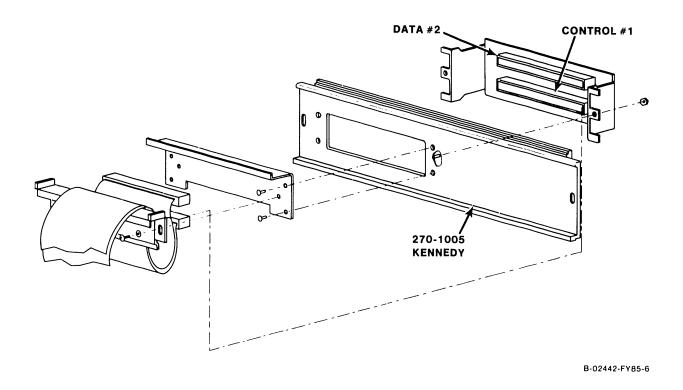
270-1005 Kennedy Tape Drive Connector Assembly
